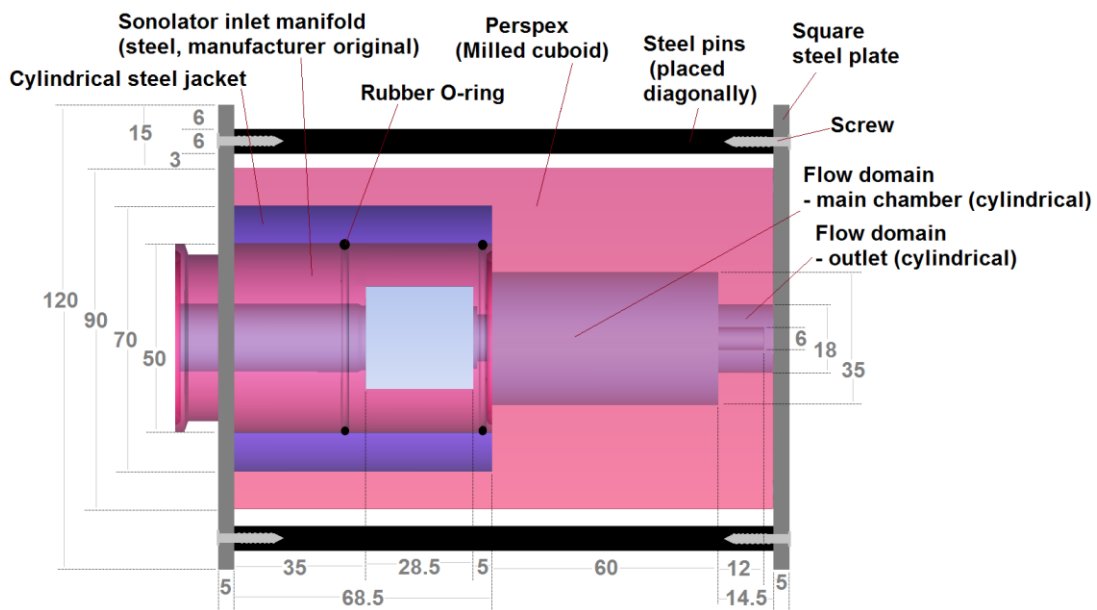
Cross-section of Sonolator assembly, ZY plane. All dimensions in millimetres unless otherwise stated.
